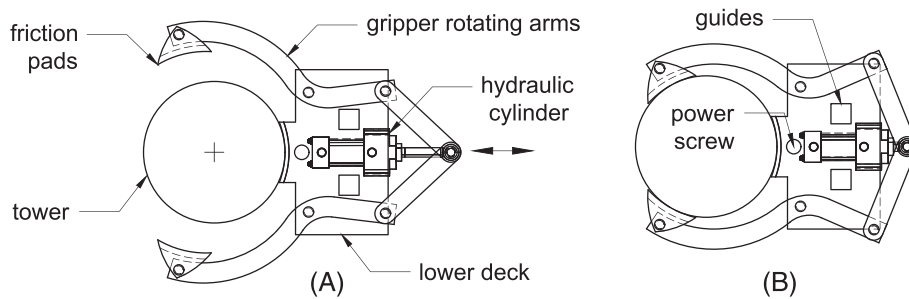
Top view of the gripper mechanism. A, Opened position; B, closed position
